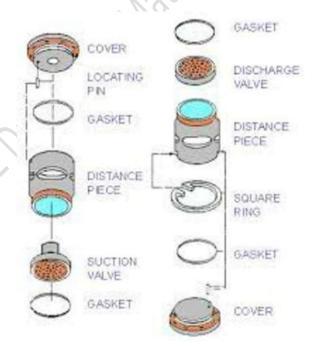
Suction (inlet) and discharge (outlet) valves of reciprocating compressor, Outlet or discharge valve
